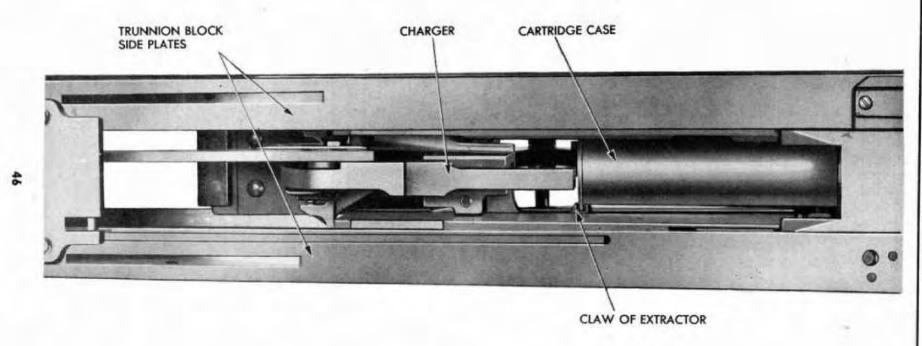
Lock Frame Assembly Moving Forward—Round Held in Claw of Extractor
